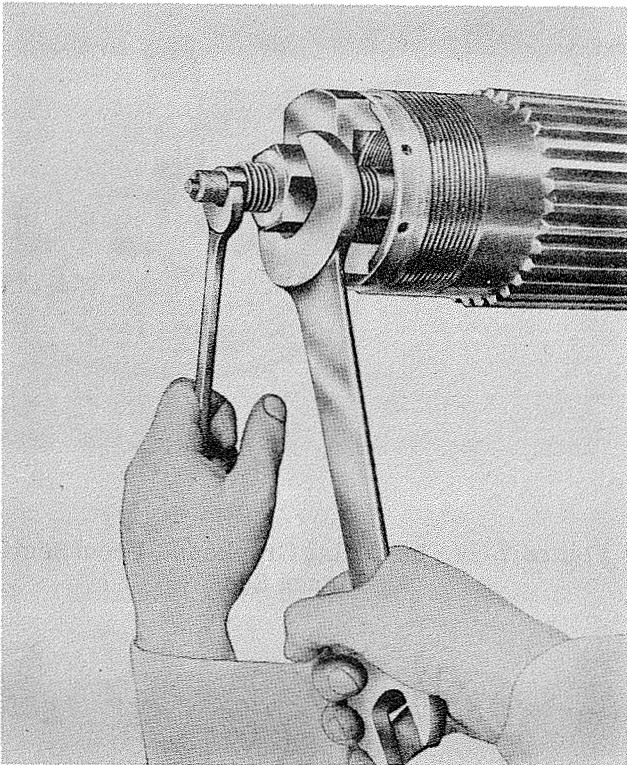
Removing Propeller Control Oil Supply Tube and Support
